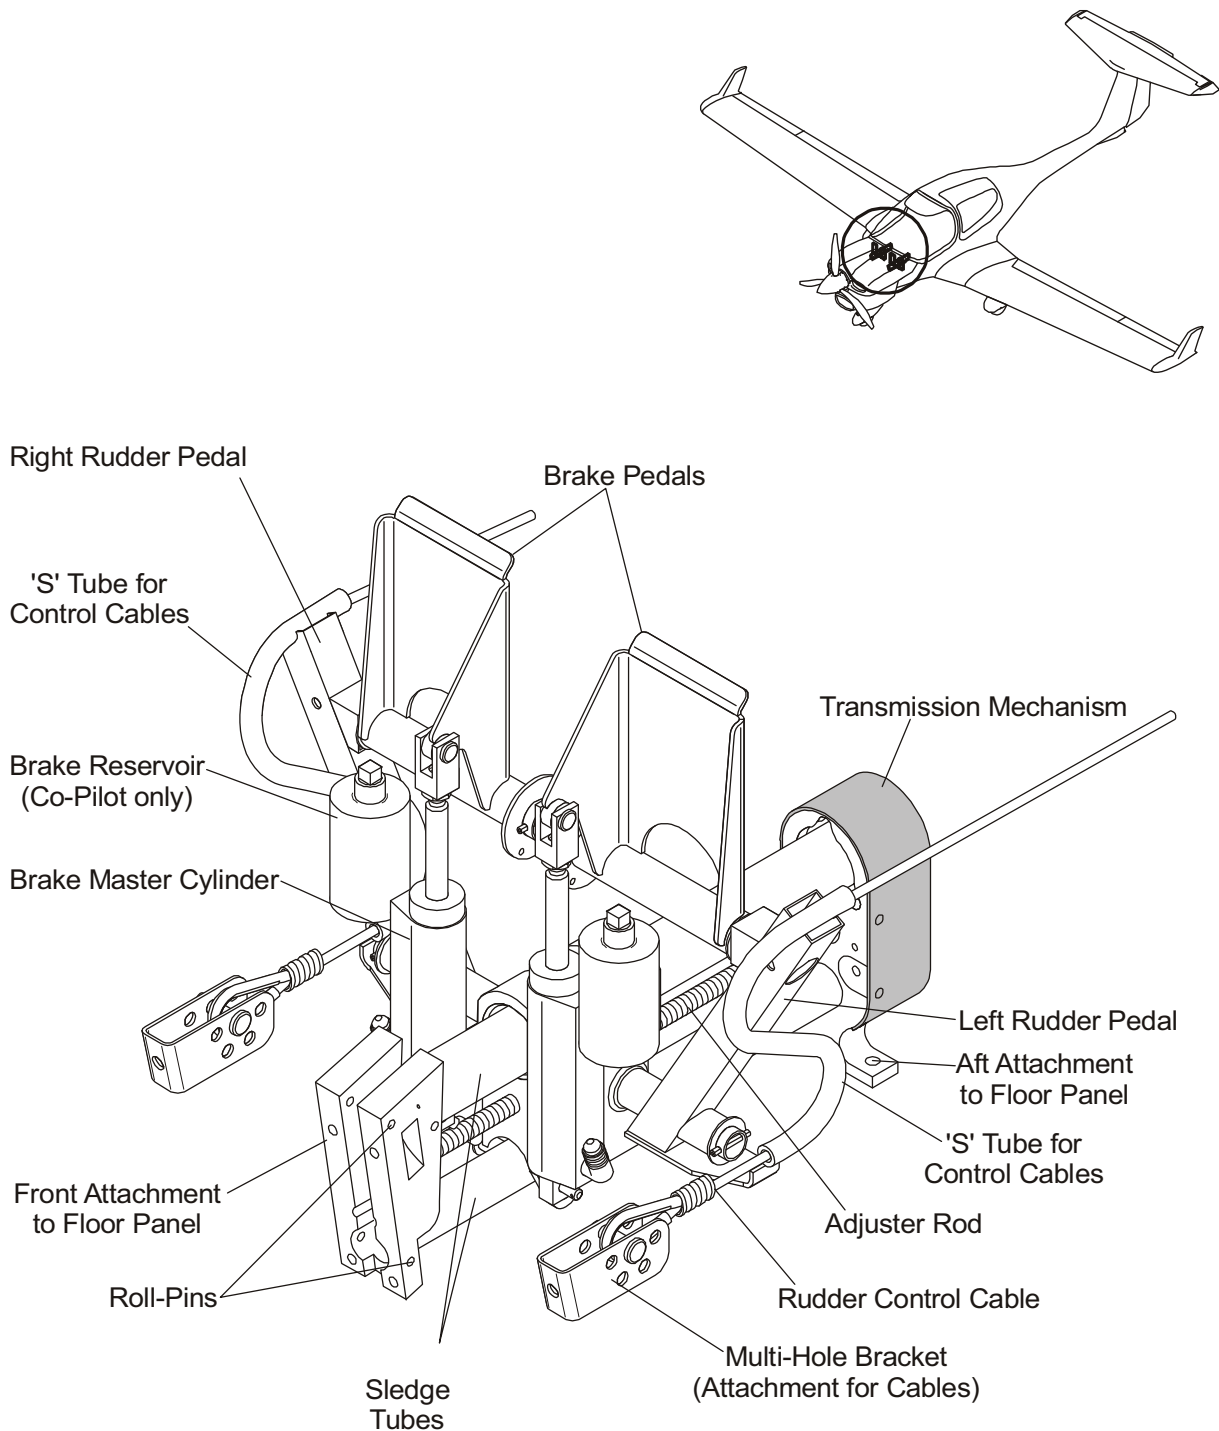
Rudder Pedal Assembly with Electrical Adjustment (OÄM 40-251 incorporated)
